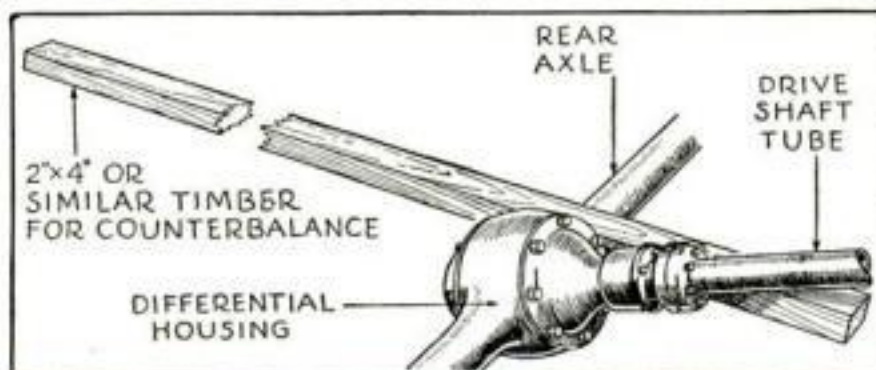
A long plank is placed over the rear axle and beneath the drive shaft tube, to raise tube so the drive shaft can be guided home
